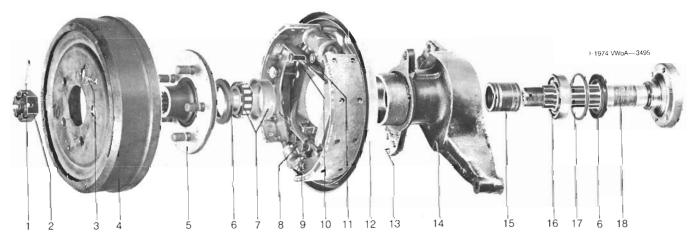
is an exploded view of the rear wheel bearing housing and brake assembly as installed on 1968 through 1970 models. Fig. 10-10 is a similar view of the rear bearing housing and brake assembly used on 1971 and later models. New seals should always be obtained for us/ during assembly. Also, the outer roller bearing race is de stroyed when it is driven out of the housing. If you intend to remove it, obtain a replacement roller bearing set in advance.
